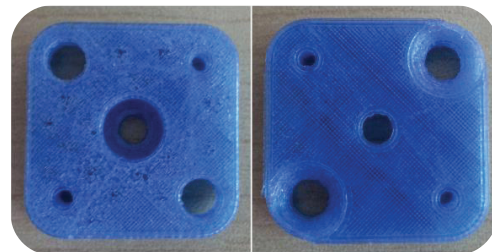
Adapted and 3D printed yoke plate (front and back view).
